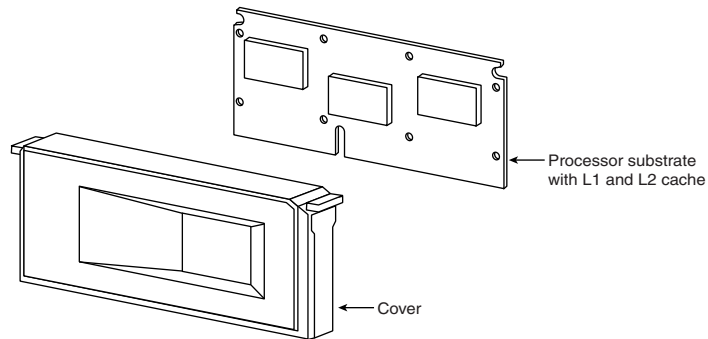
Two SECC, rev. 2 components showing a half-enclosed processor board.
